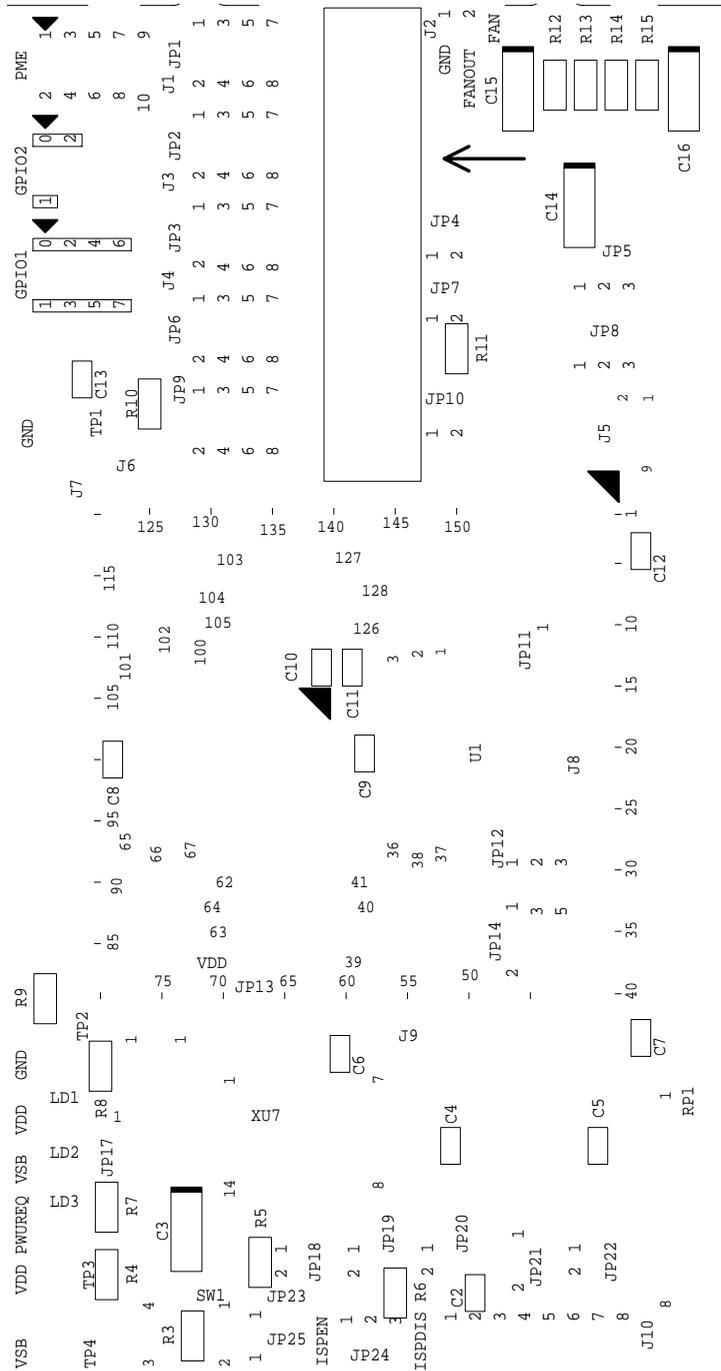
PC87351EB Extension Board Print-Side Layout
